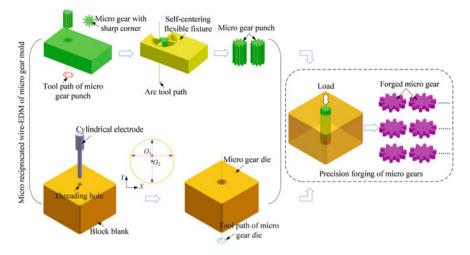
Machining process of micro-gears combining micro-reciprocated wire EDM and precision forging [7]
